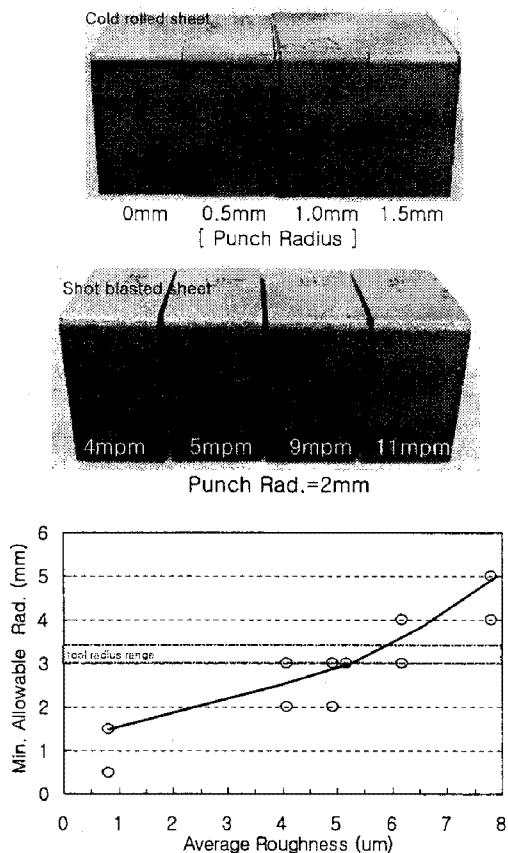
Tested specimen and minimum bending radius and shot blasted surface roughness.
